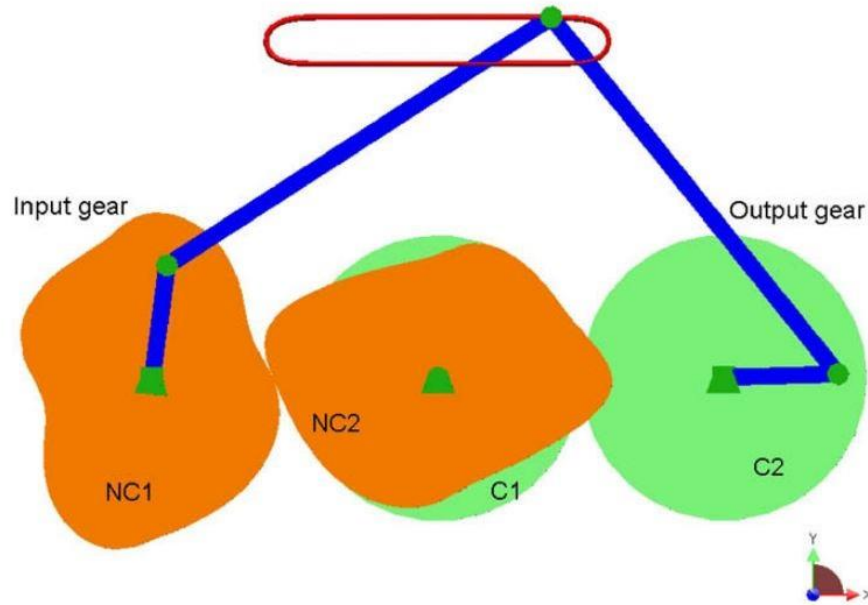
CAD assembly model of Geared Five-Bar Mechanism (GFBM) with non-circular gears.
